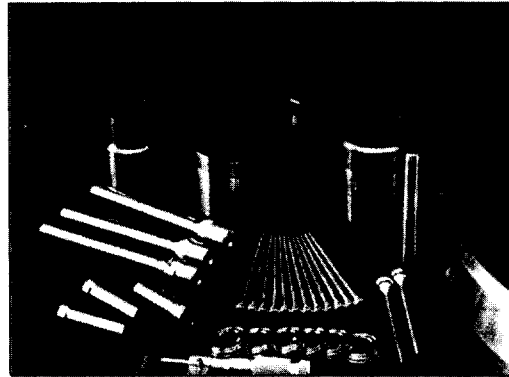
Examples of Aluminum to Steel, Titanium to Aluminum and Titanium to Stainless Steel Tubular Transition Joints Machined from Explosion Clad Plate (explosion fabricators, Inc. photograph)
